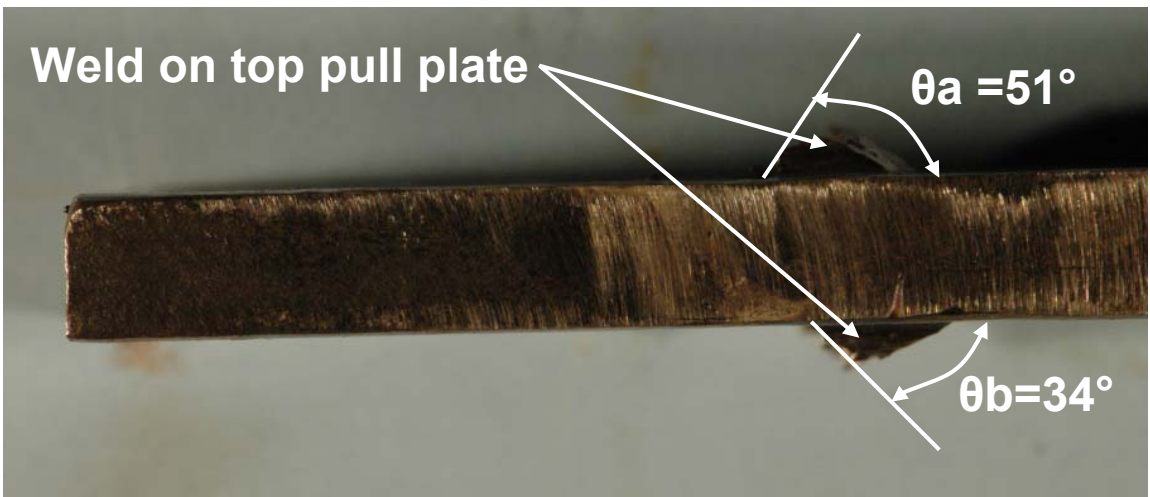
Photograph of a side view Specimen 1, where the profile of the fractured weld on the top pull plate is visible
